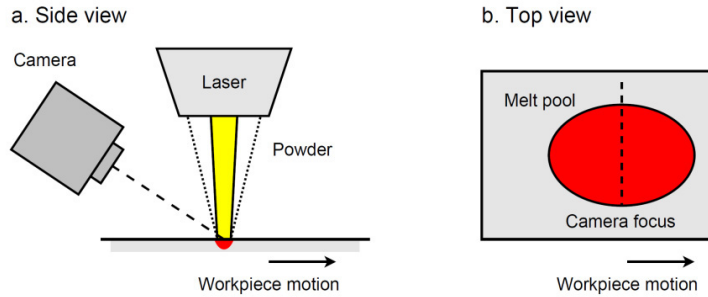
Side view (left) and top view (right) of the measurement setup.
